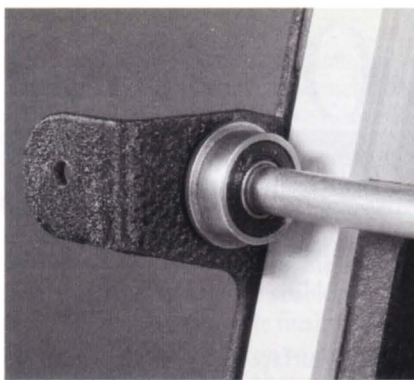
A roller bearing is shown installed on one of the shafts that support the weight of the enlarger head. The flange should fit between the rail and the frame. This bearing is key to the improvements realized in enlarger motion and alignment stability.
